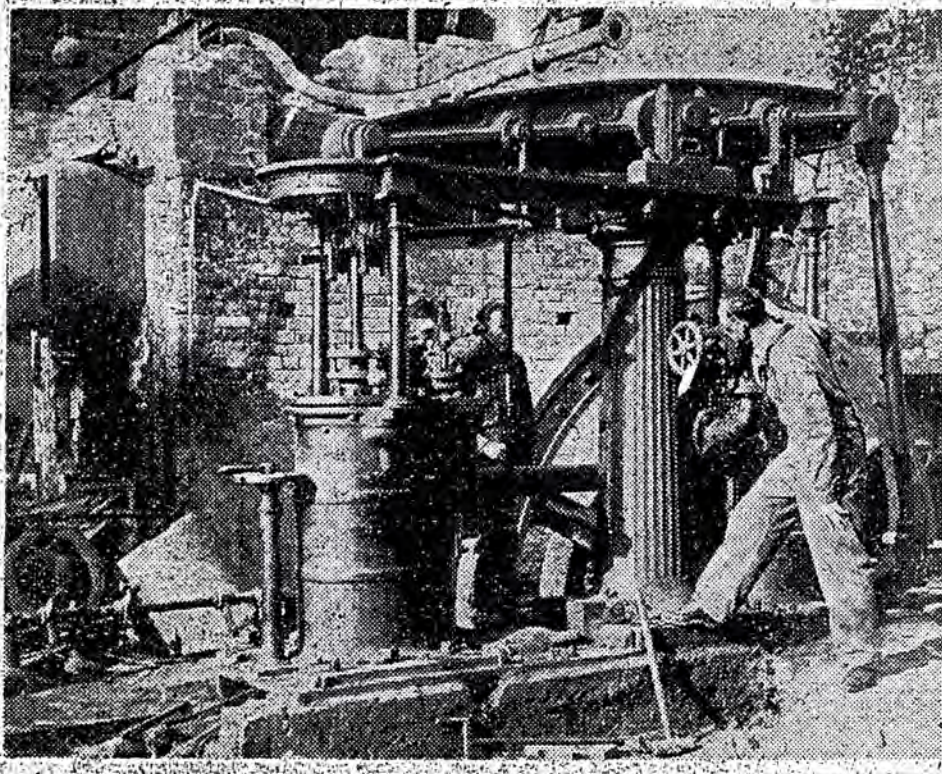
Note excessive clearance between Flywheel & Crankshaft requiring the use of four large wedges.
